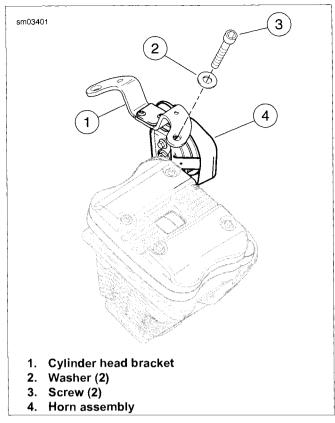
Horn and Cylinder Head Bracket: XL Models (side mounted horn)
